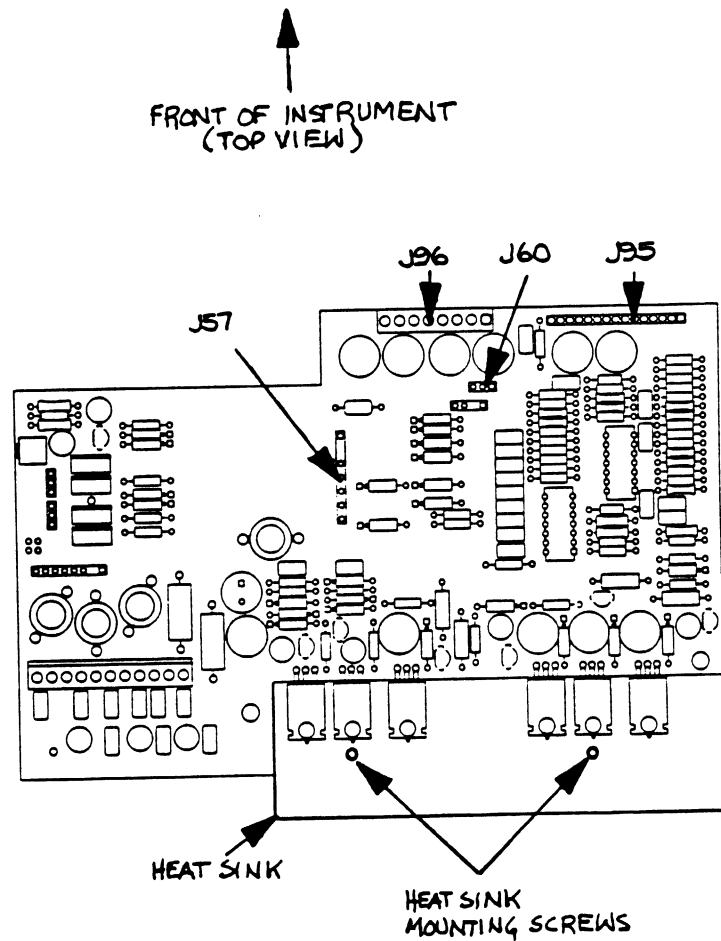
Connector locations for removal of the A4 Regulator Board.
